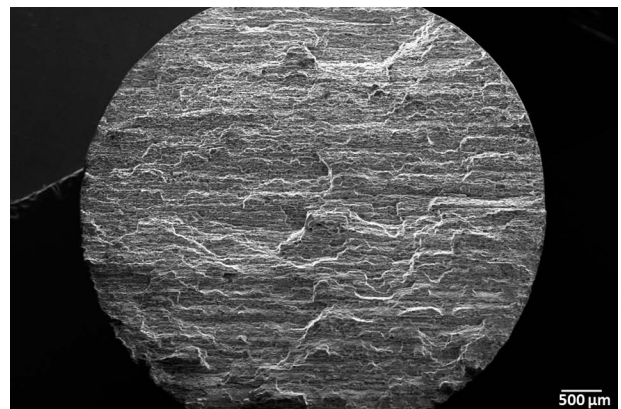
Low magnified fracture surface of room temperature tensile-tested aluminum alloy AA 2014-T6511. Note the direction of thermomechanical processing
